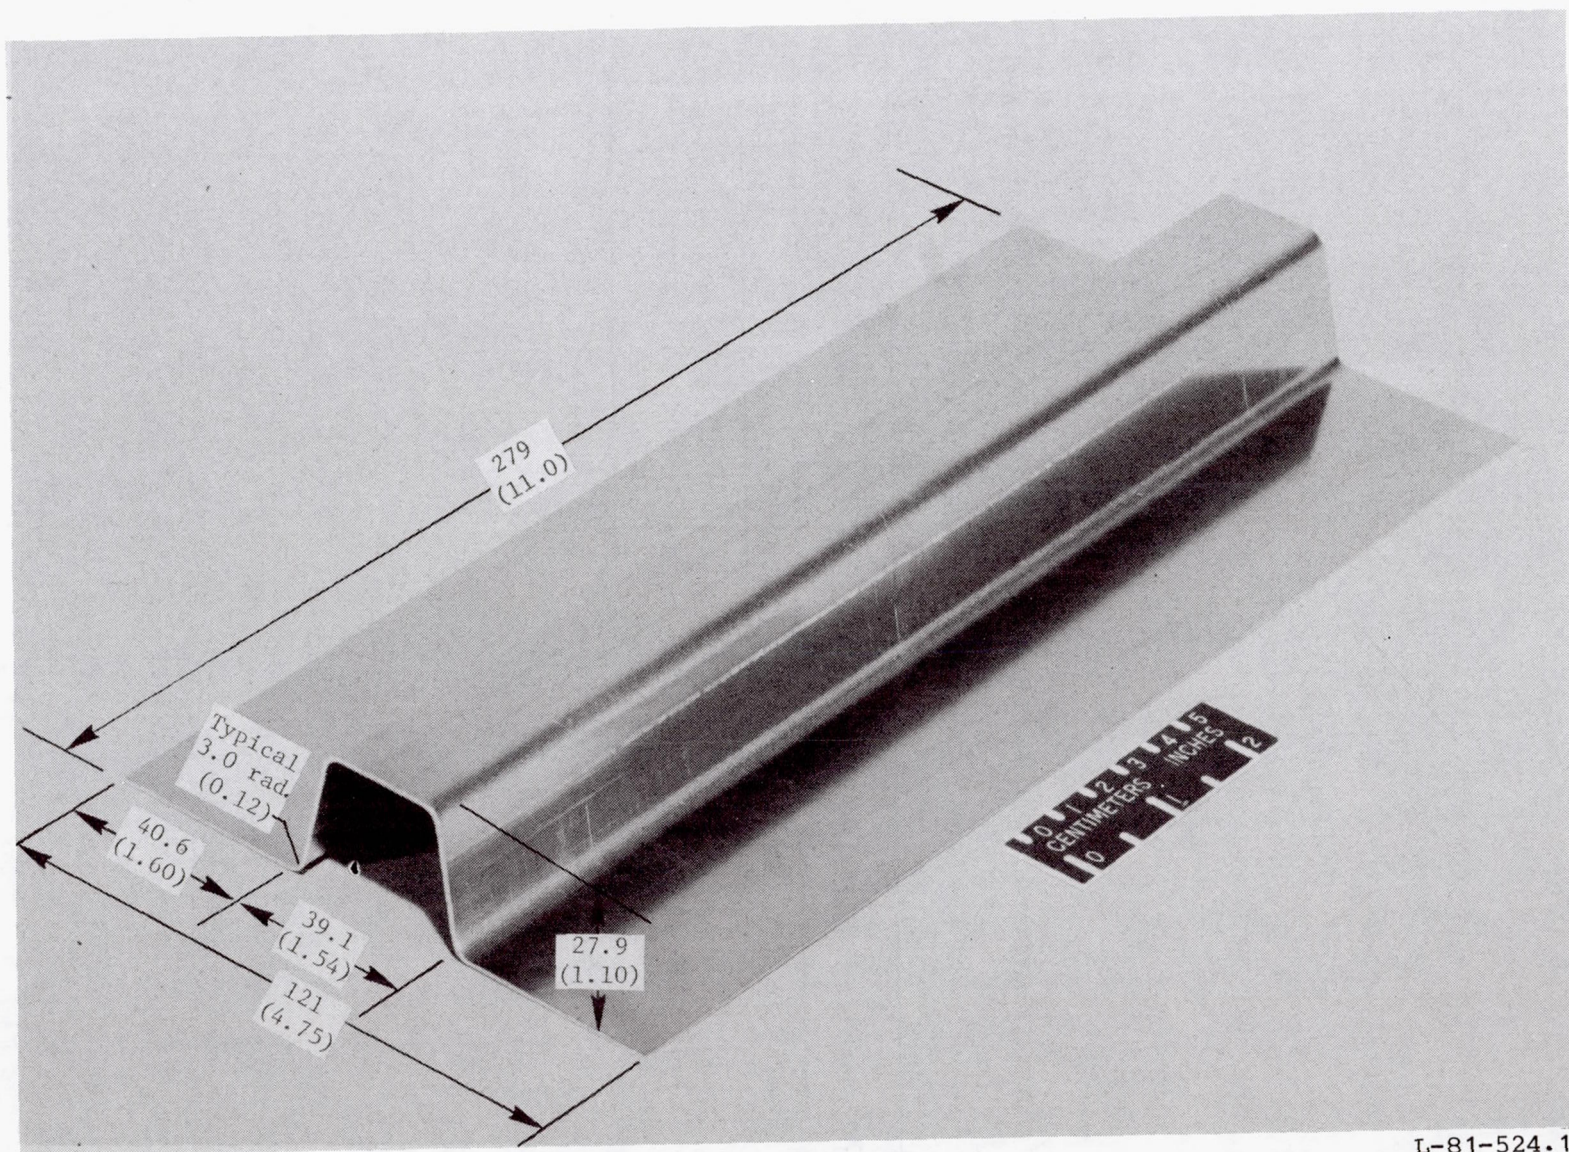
Cold-formed beta Ti-15-3 stiffener. Dimensions are in millimeters (inches).
